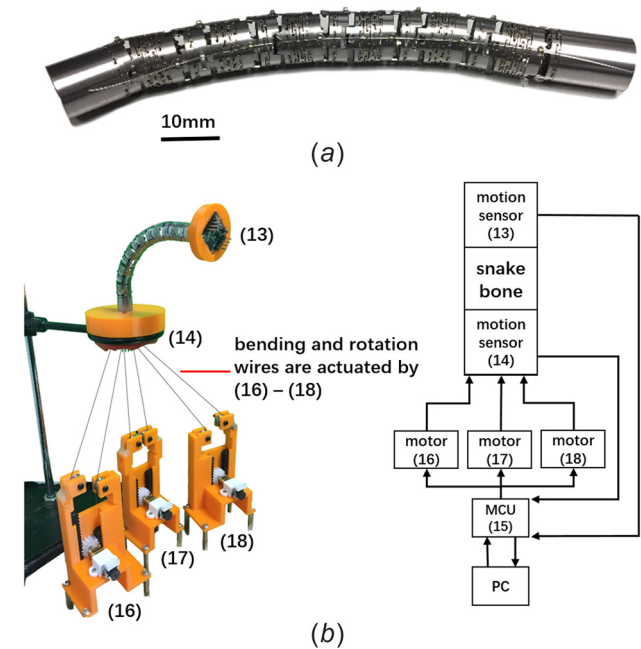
Fabrication and validation: (a) the machined snake bone is laser machined as one piece and (b) the experimental setup and schematic
